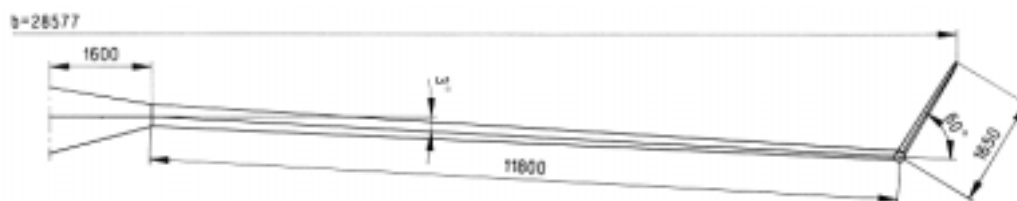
PW-114 HALE aircraft – geometry of wing stabilizer (front view)
